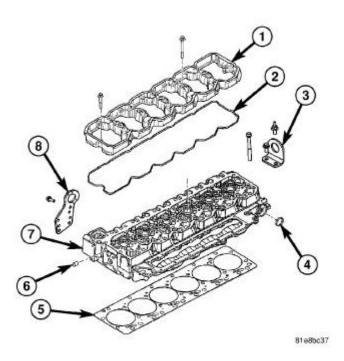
Cylinder Head Assembly & Gasket Courtesy of CHRYSLER GROUP, LLC
